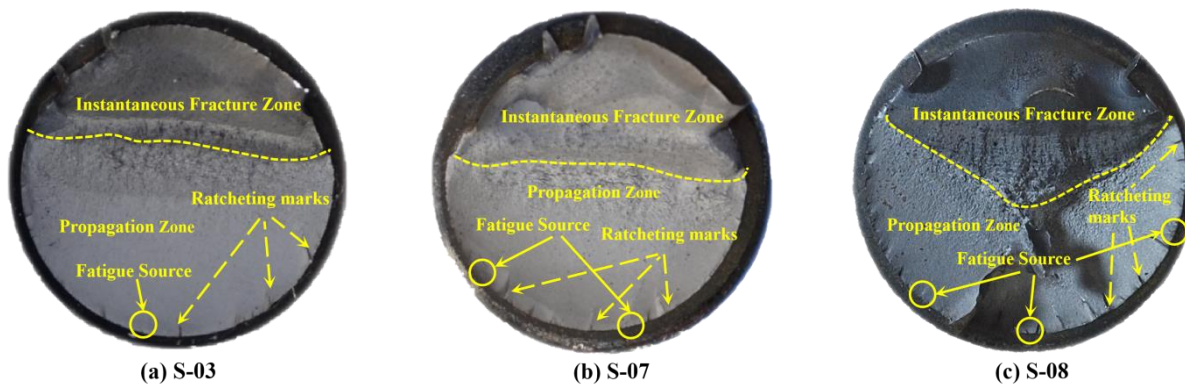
Macroscopic fracture morphology of the high-strength bolts
